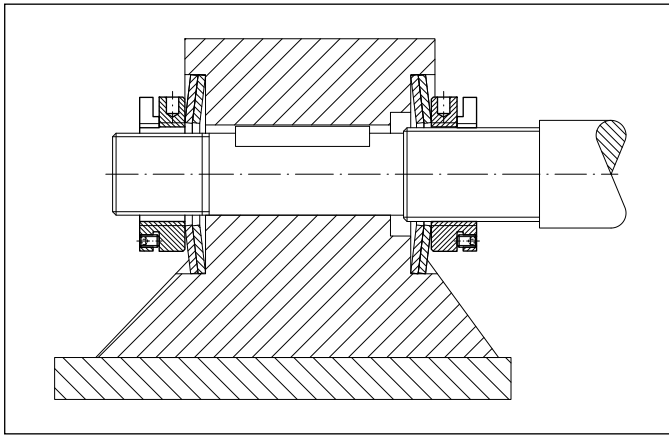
Non-locating spindle bearing with INA precision locknut AM
